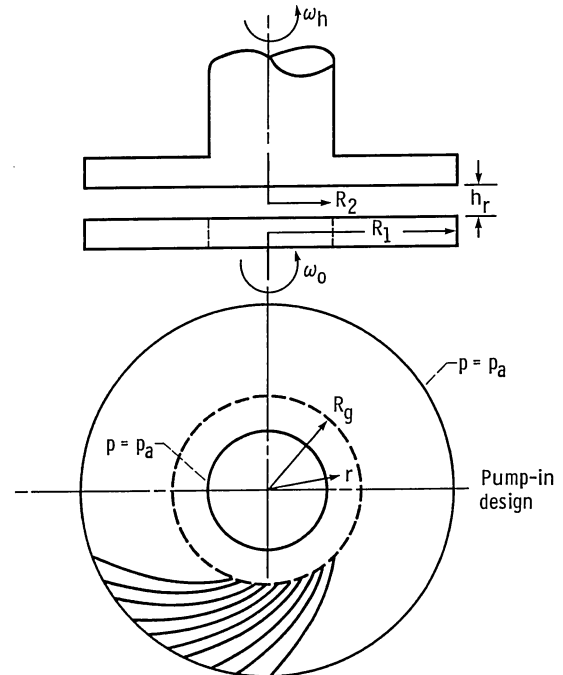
Configuration of spiral-groove thrust bearing. (From Reiger, 1967.)
